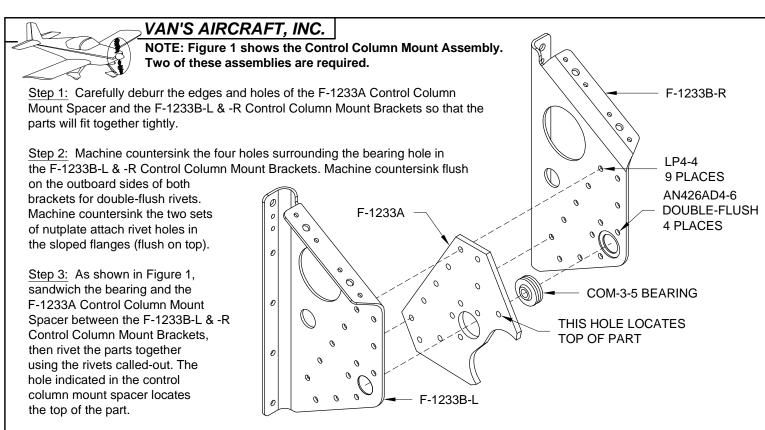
CONTROL COLUMN MOUNT ASSEMBLY
